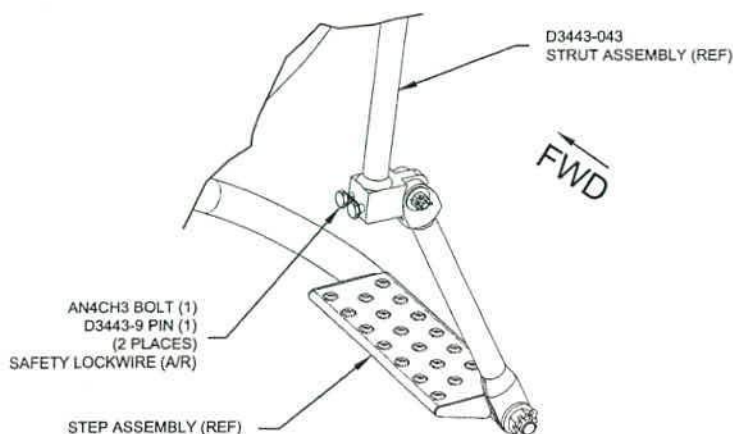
Detail View D3462-042 Bracket Assembly (-032 Installation, Shown) D3462-041, (-031 Installation Opposite)
